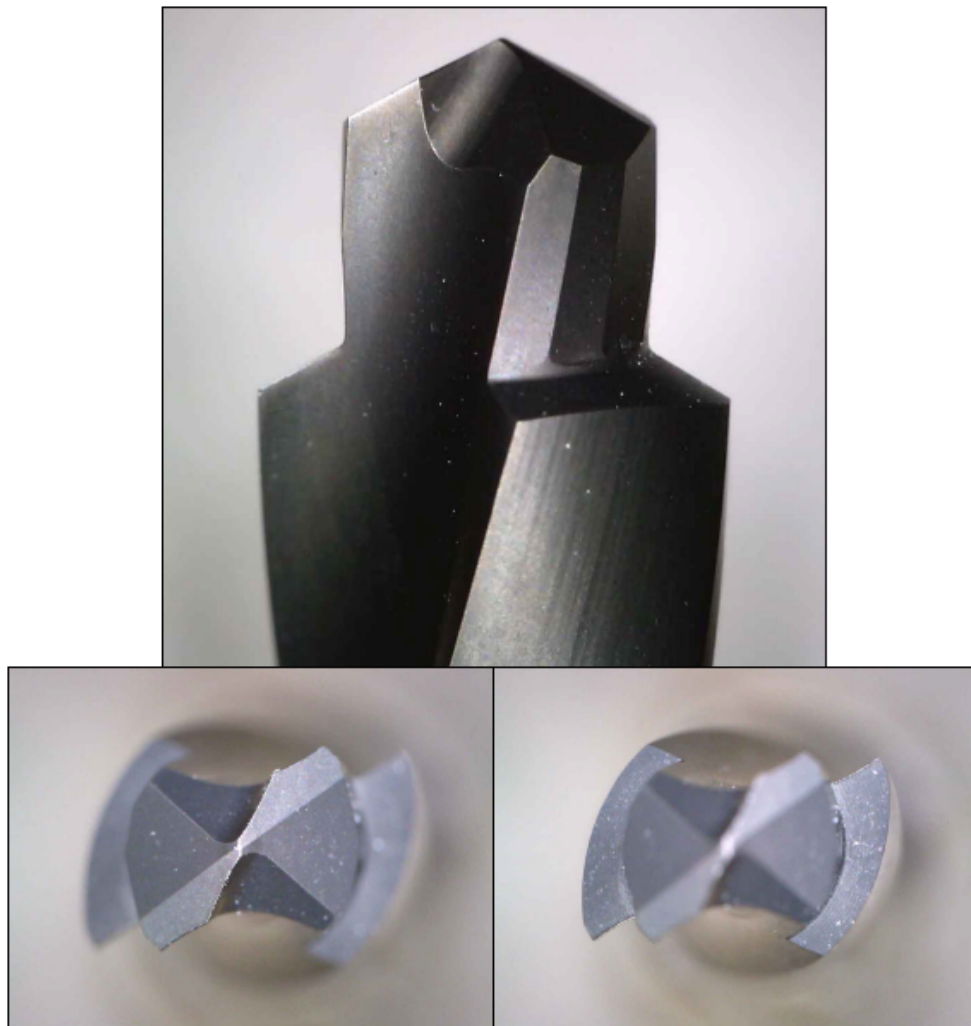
Tool wear after 52 holes using the semi-automatic machine with the parameters of the pneumatic machine.
